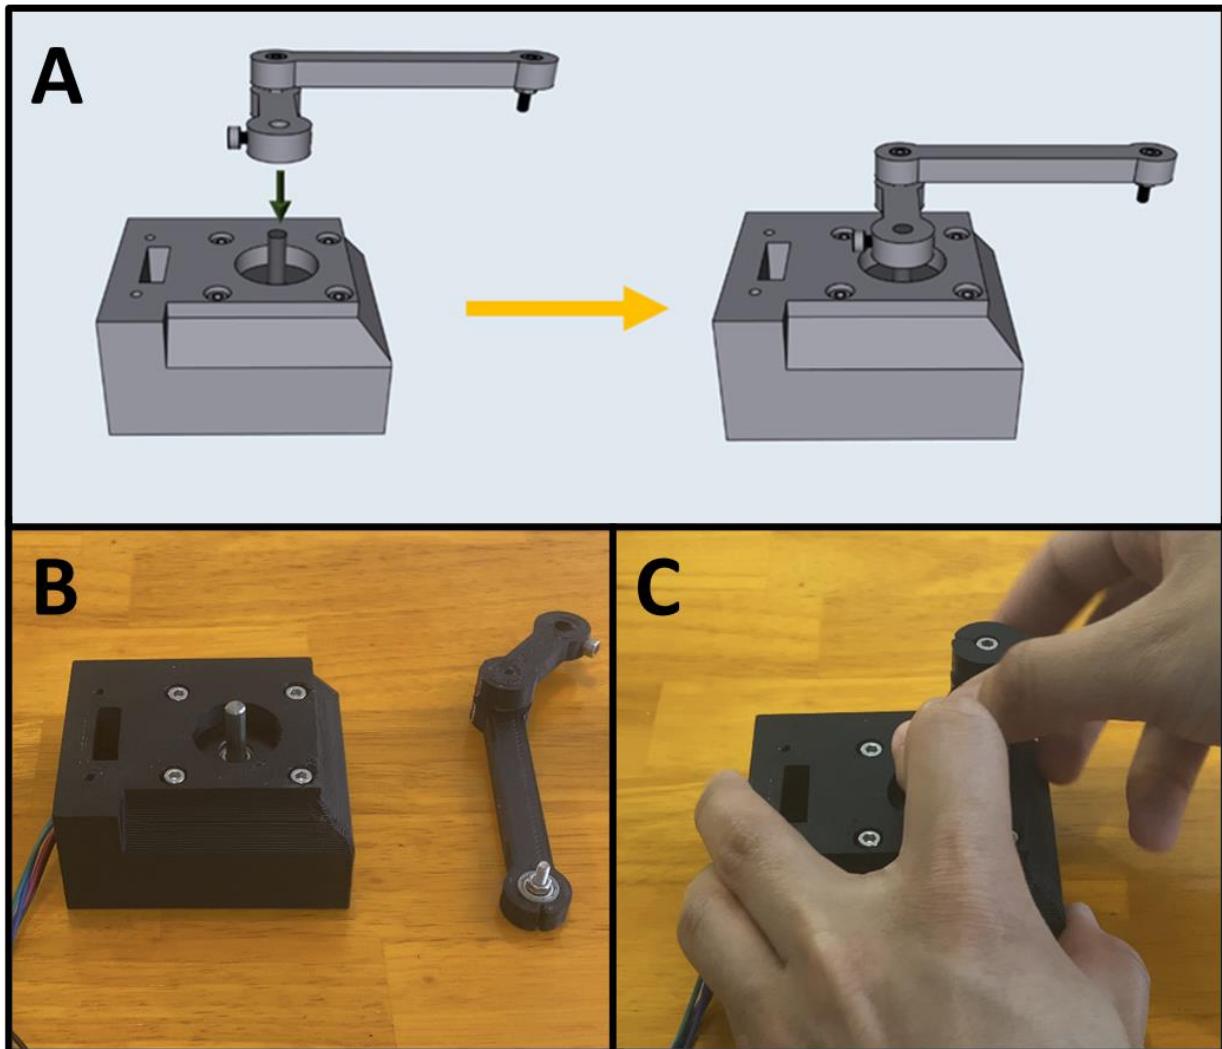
c: The procedure for attaching Arm Two and Three to the lower motor mount.
